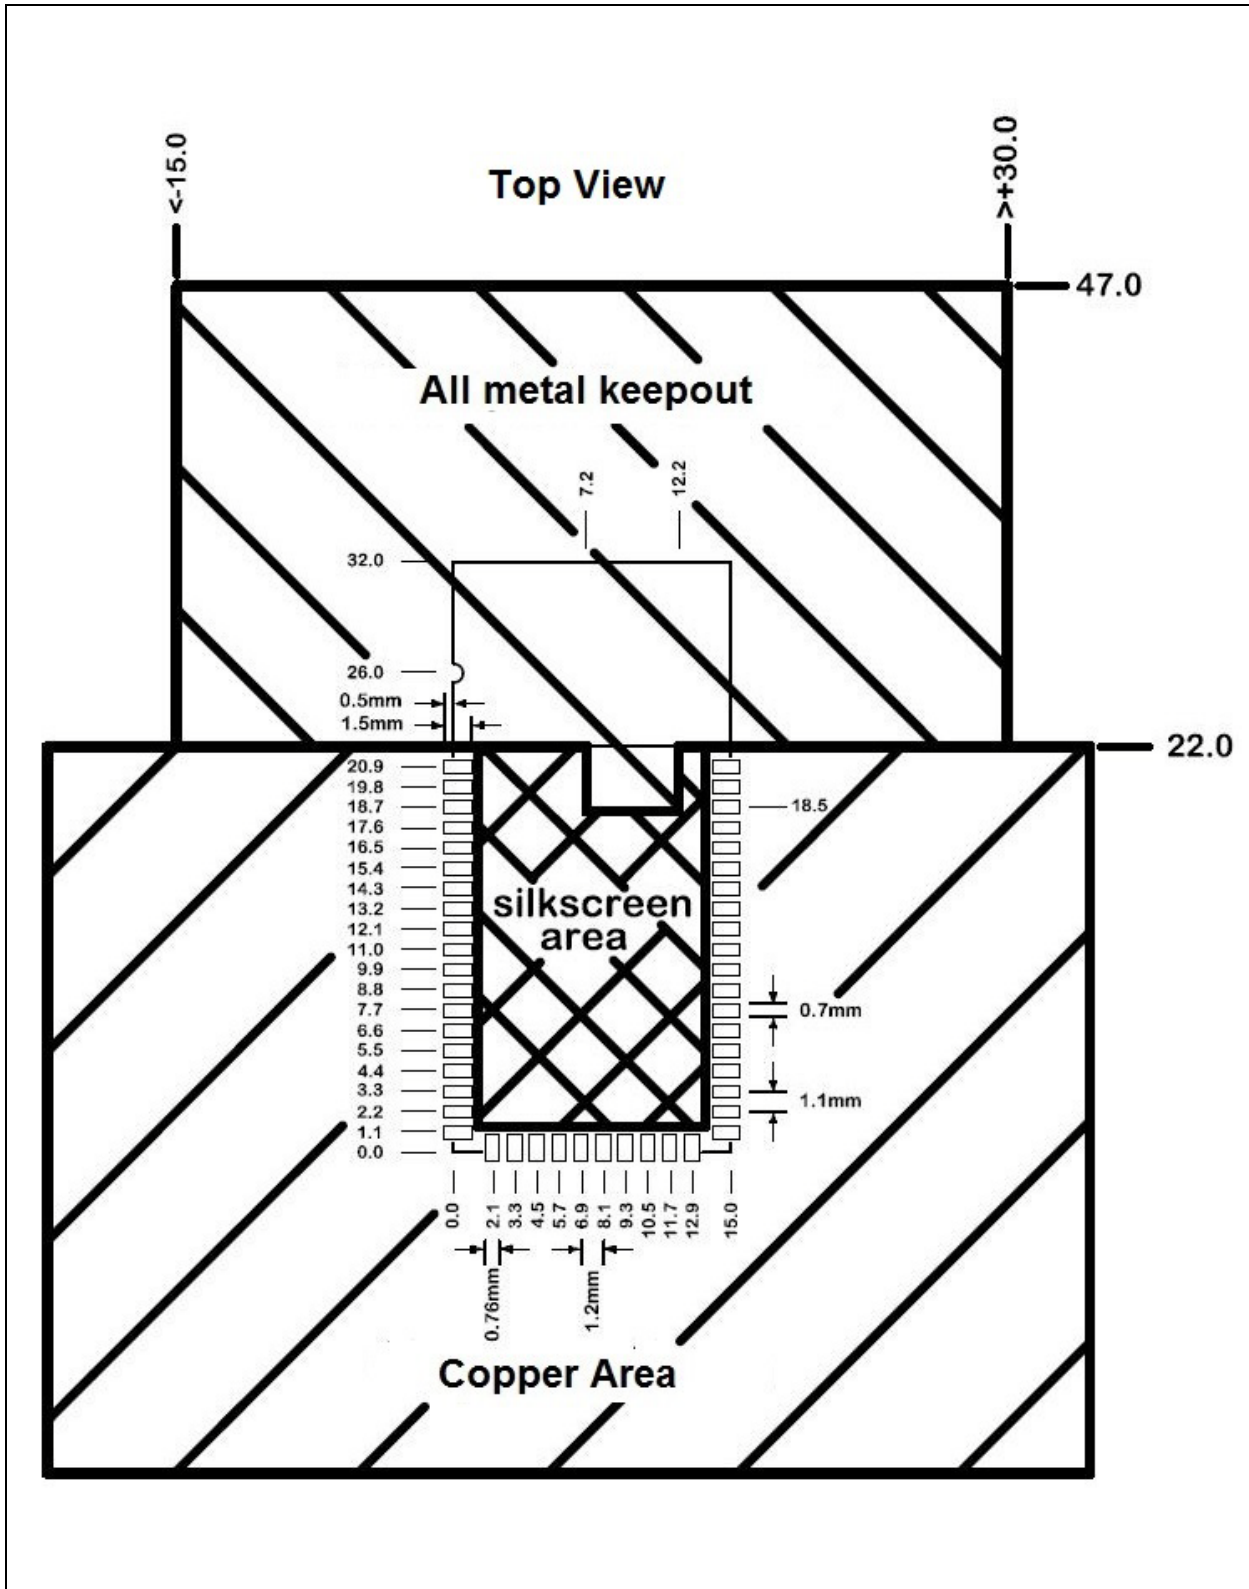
illustrates the PCB dimension of the BM63 module and Figure 7-2 illustrates the PCB footprint of the BM63 module.
